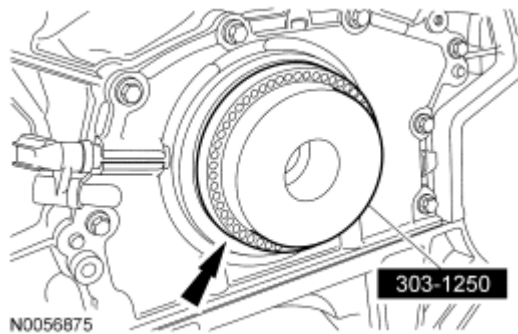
Positioning Special Tool (303-1250) Onto End Of Crankshaft
